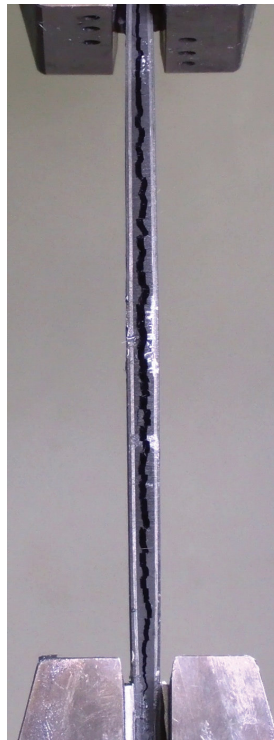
Photograph of free-edge delamination in a $[45_4/0_4/ - 45_4/90_4]_s$ open hole tensile test specimen.
